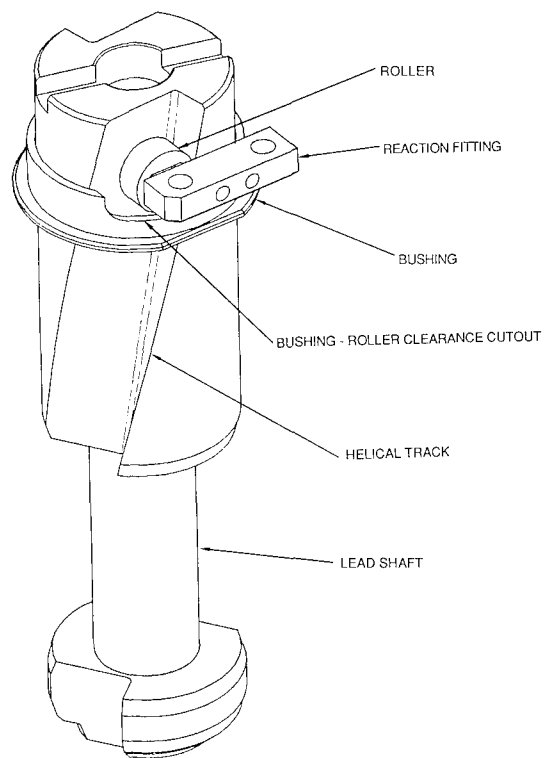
LEAD SHAFT - BUSHING - ROLLER ARRANGEMENT
